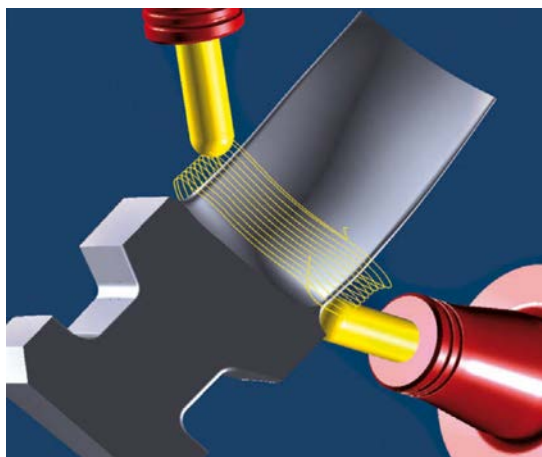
Machining of the 5-axis blade root fitting[14]
